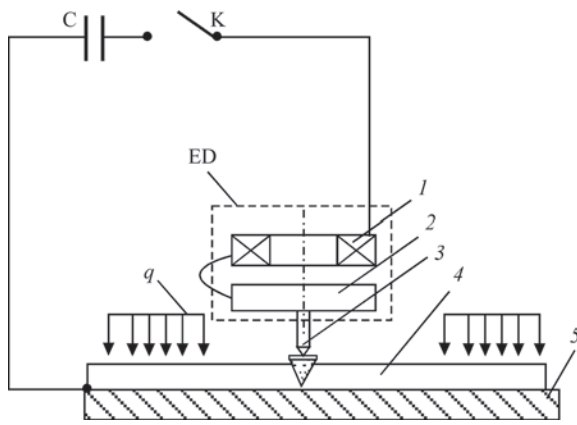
Circuit of EDT of welded joints (C — energy storage capacitor; K — power key; q — fixing load); 1 — inductor; 2 — disc; 3 — electrode; 4 — specimen; 5 — assembly plate
